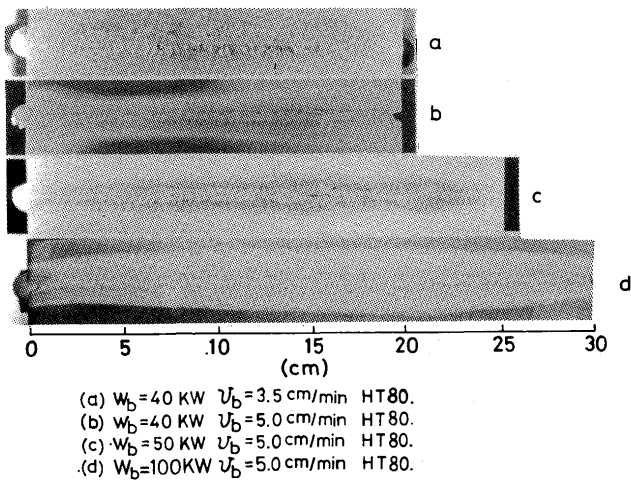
Fully penetrated bead cross sections of upward vertical position welding.
